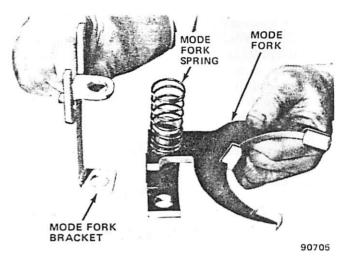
D-66 Assembling Mode Fork, Spring and Bracket
